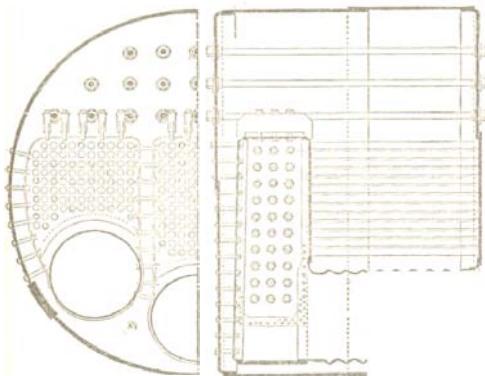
The "Scotch" or Cylindrical, Marine Boiler.
